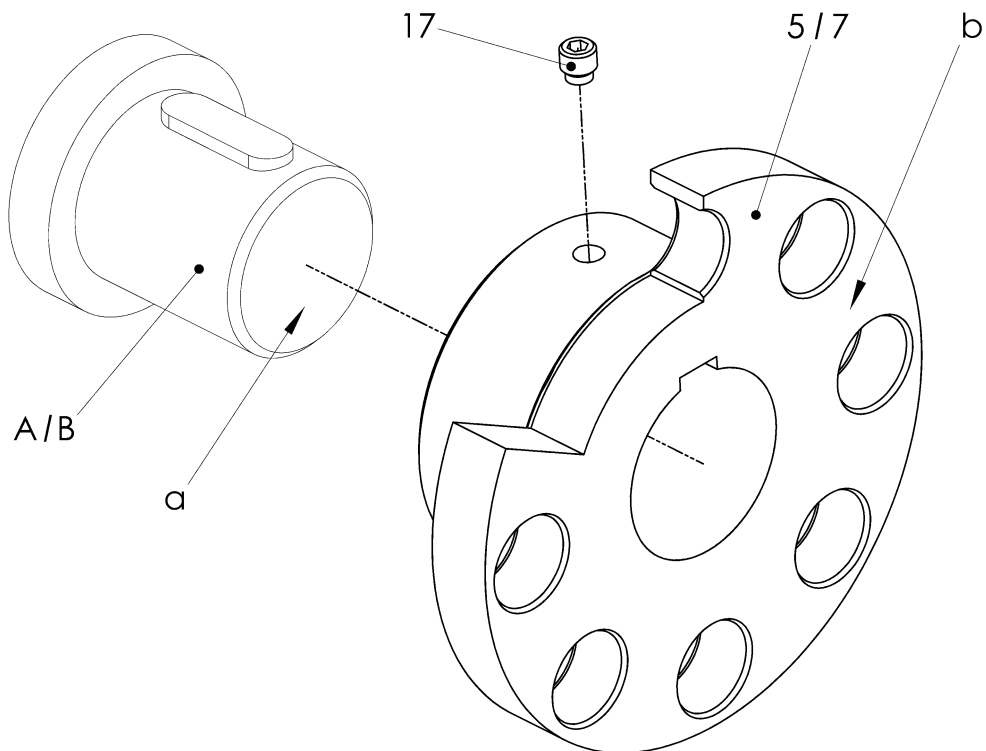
Mounting the hub (5/7) with cylindrical bore and keyway
